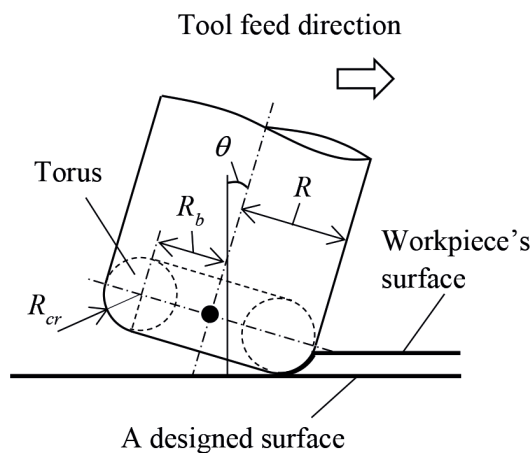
Several radii and a tool inclination angle θ in filleted end milling
